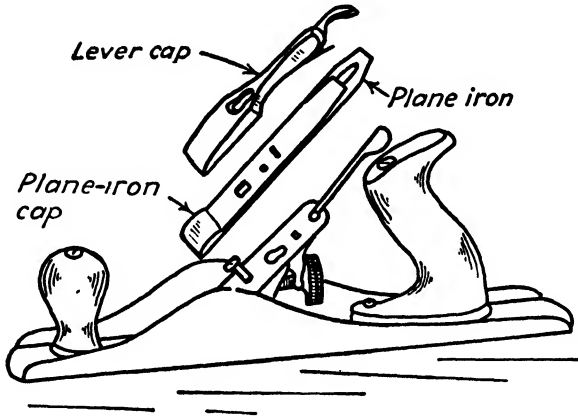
Assemble the plane with the beveled edge of the plane iron down.
